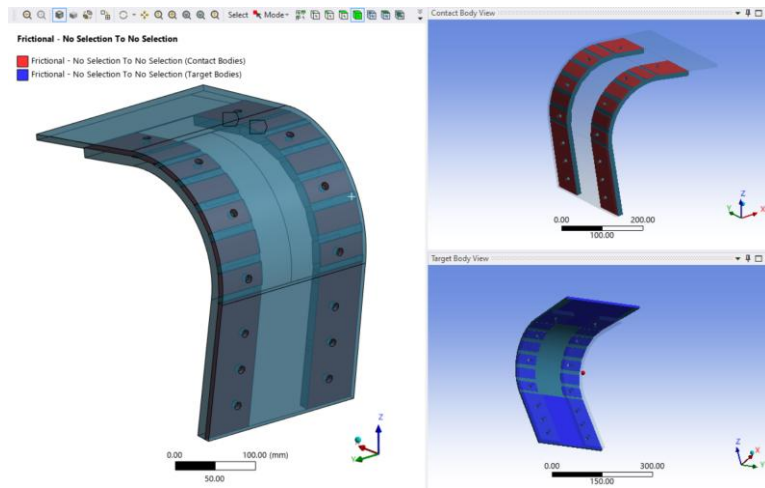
Frictional contacts between OVT back plate and OVT flanges (as shown in figure the connection is faceted type)
